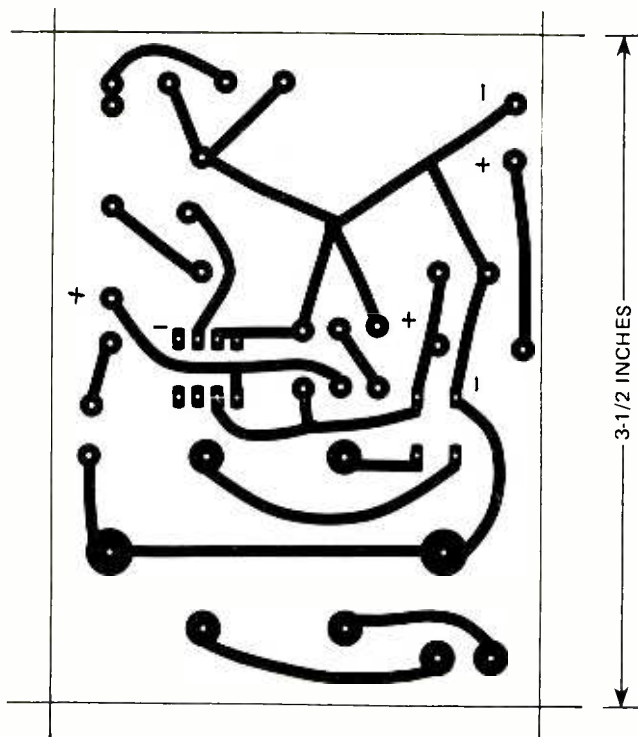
PRINTED-CIRCUIT BOARD foil-side-up layout (left) can be managed by beginners. If you wish, point-to-point wiring may be used.
